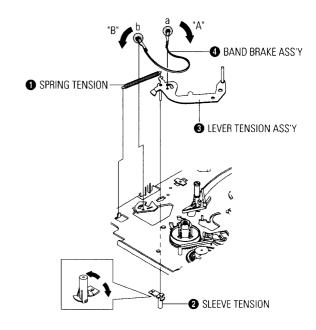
Lever Tension Ass'y, Band Brake Ass'y, Sleeve Tension Removal
